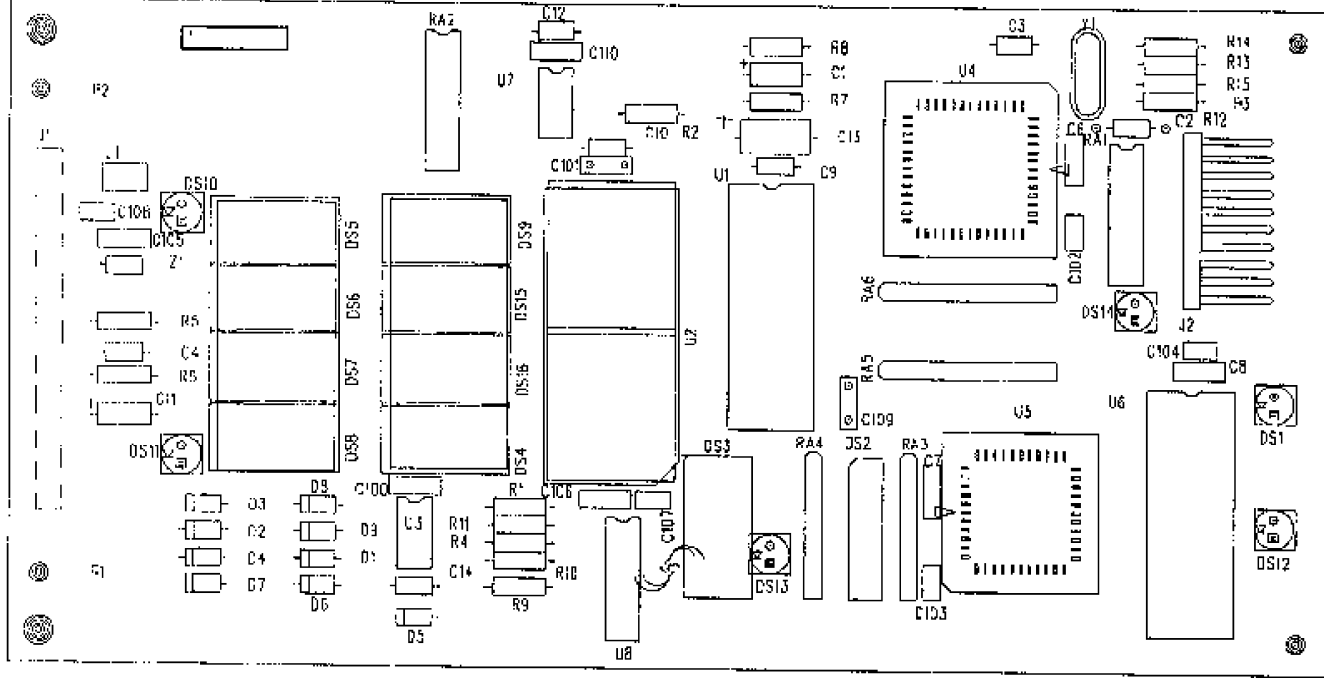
Parts Identification Display Circuit Assembly [v8.12] PN 1310-7044-1
